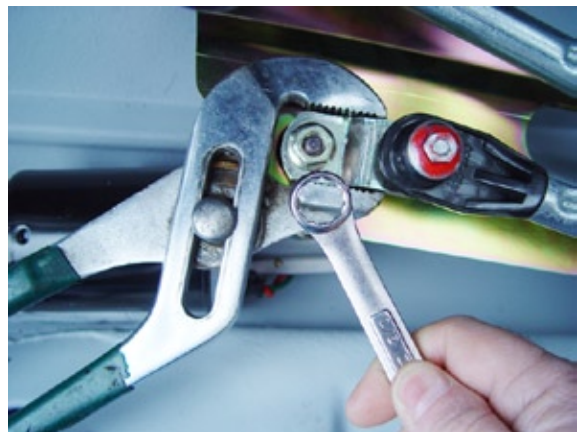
If adjustment is needed, channel locks keep the Drive Arm from rotating while a 13MM wrench is used to loosen, but not remove, the spindle nut on the Wiper Motor Spindle.
